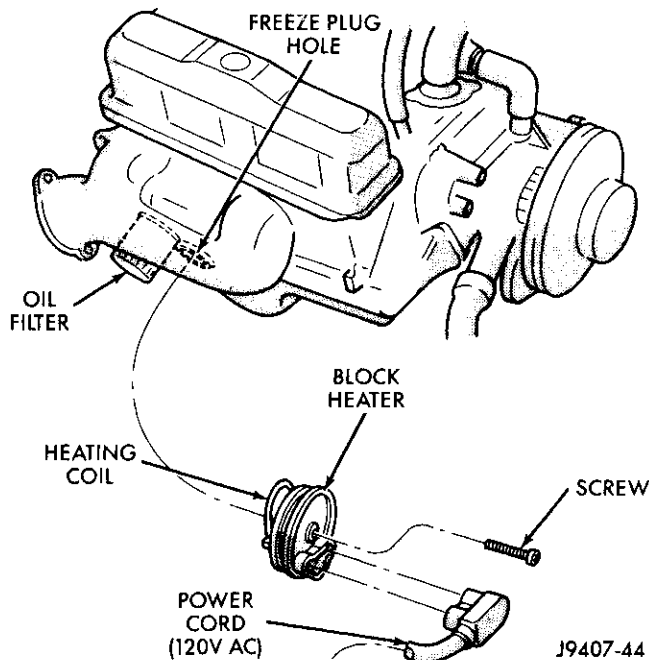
Engine Block Heater—3.9L/5.2L/5.9L Gas Powered Engine
